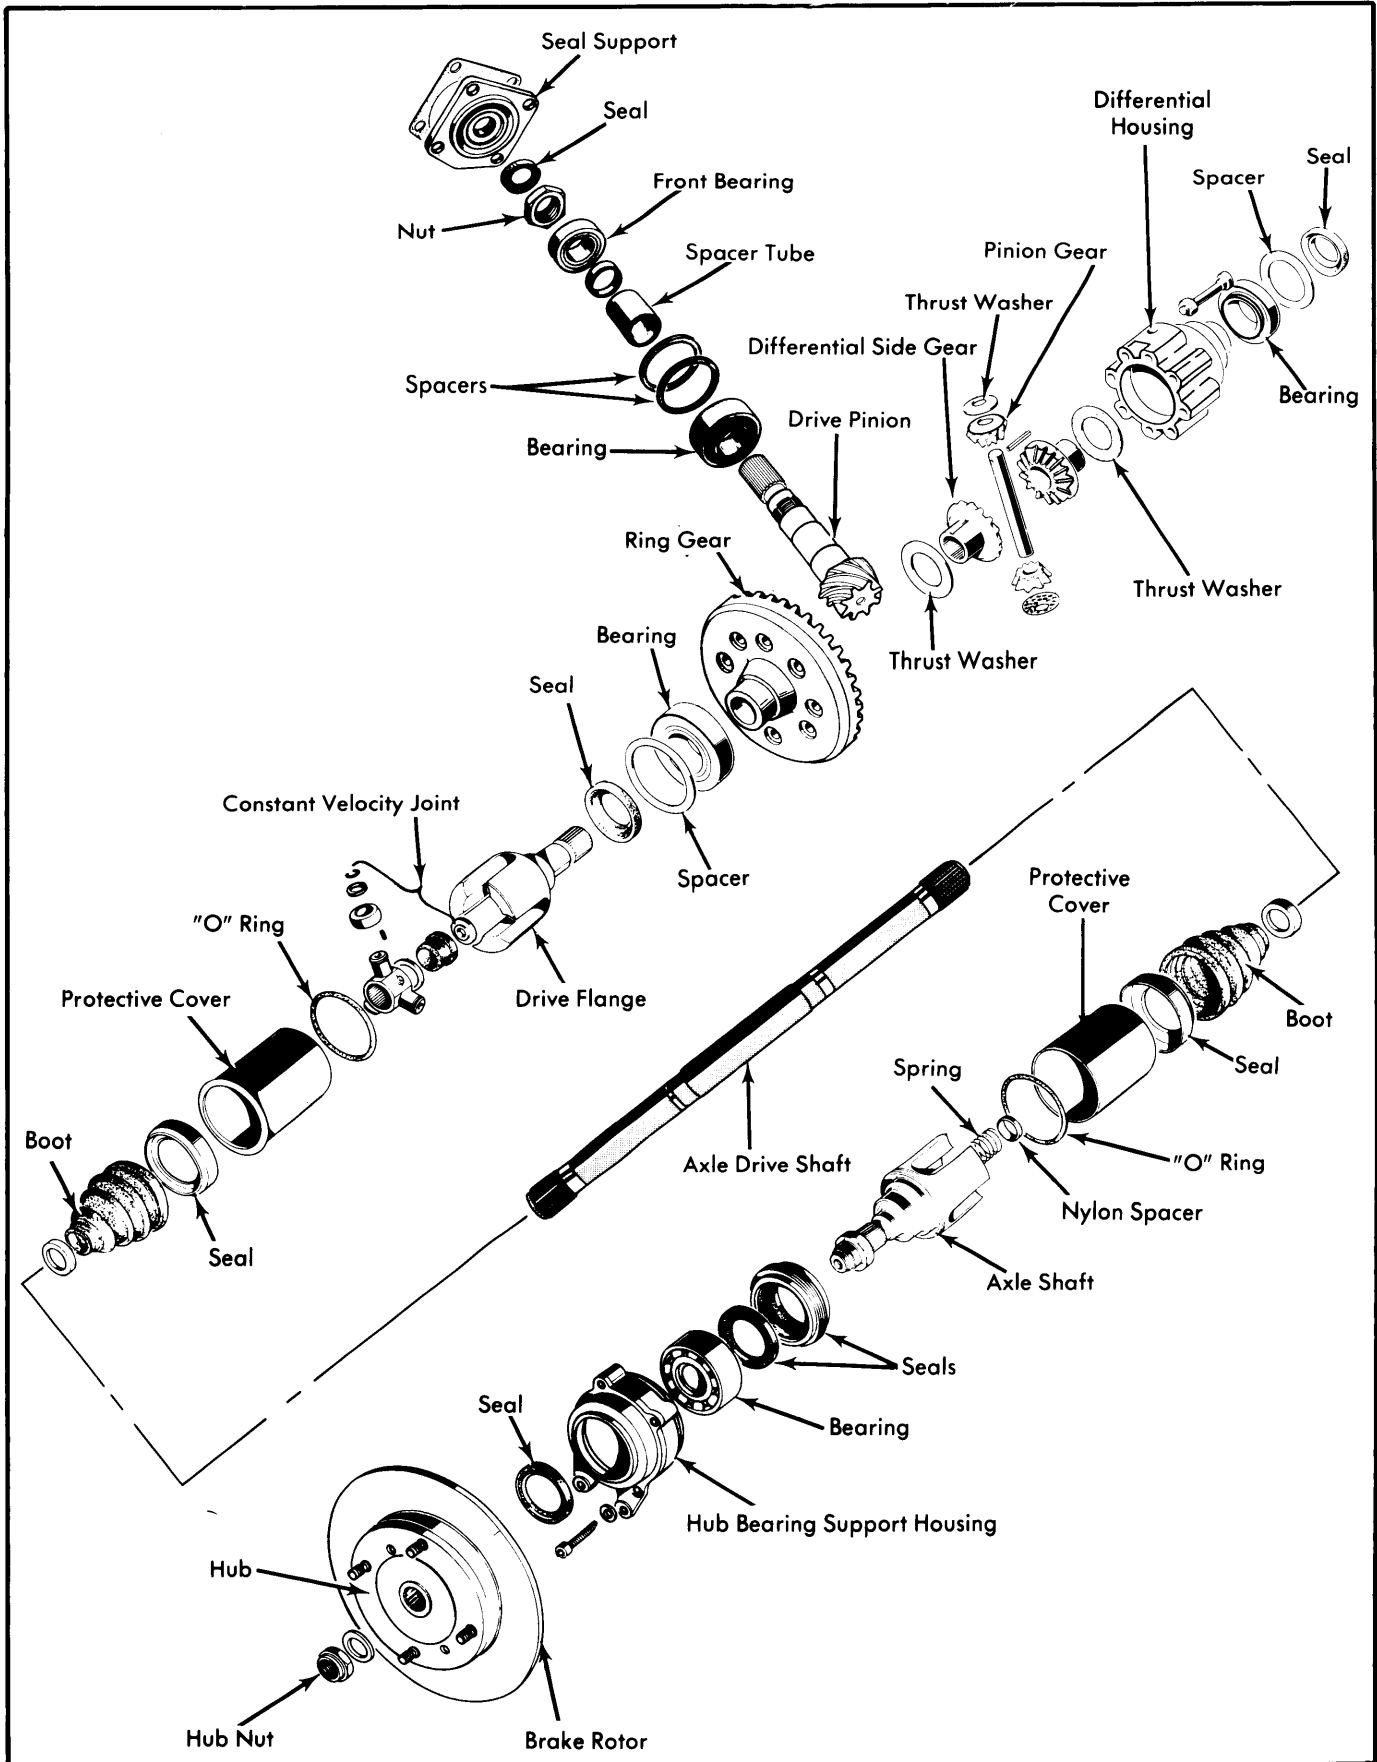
Exploded View of Peugeot Independent Rear Suspension (I.R.S.) Drive Axle Assembly
